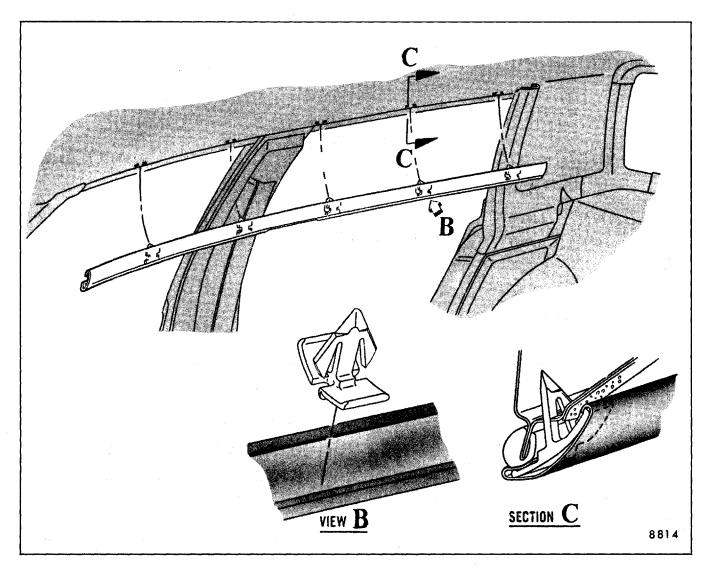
Side Roof Garnish Molding Attachment - K Styles
